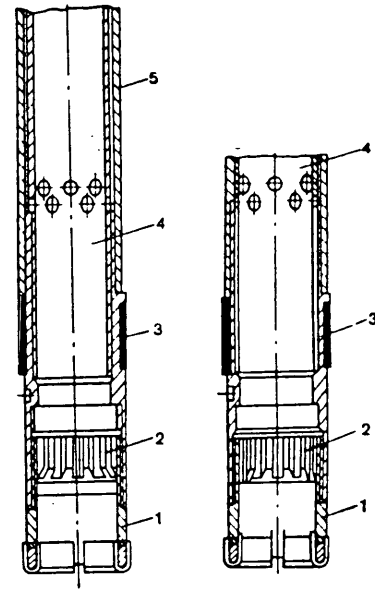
Double-tube core barrels for diamond drilling. (a) rigid barrel (b) swivel barrel; 1- diamond bit; 2- core lifter; 3- diamond reamer shell; 4- inner barrel (tube); 5- outer barrel
